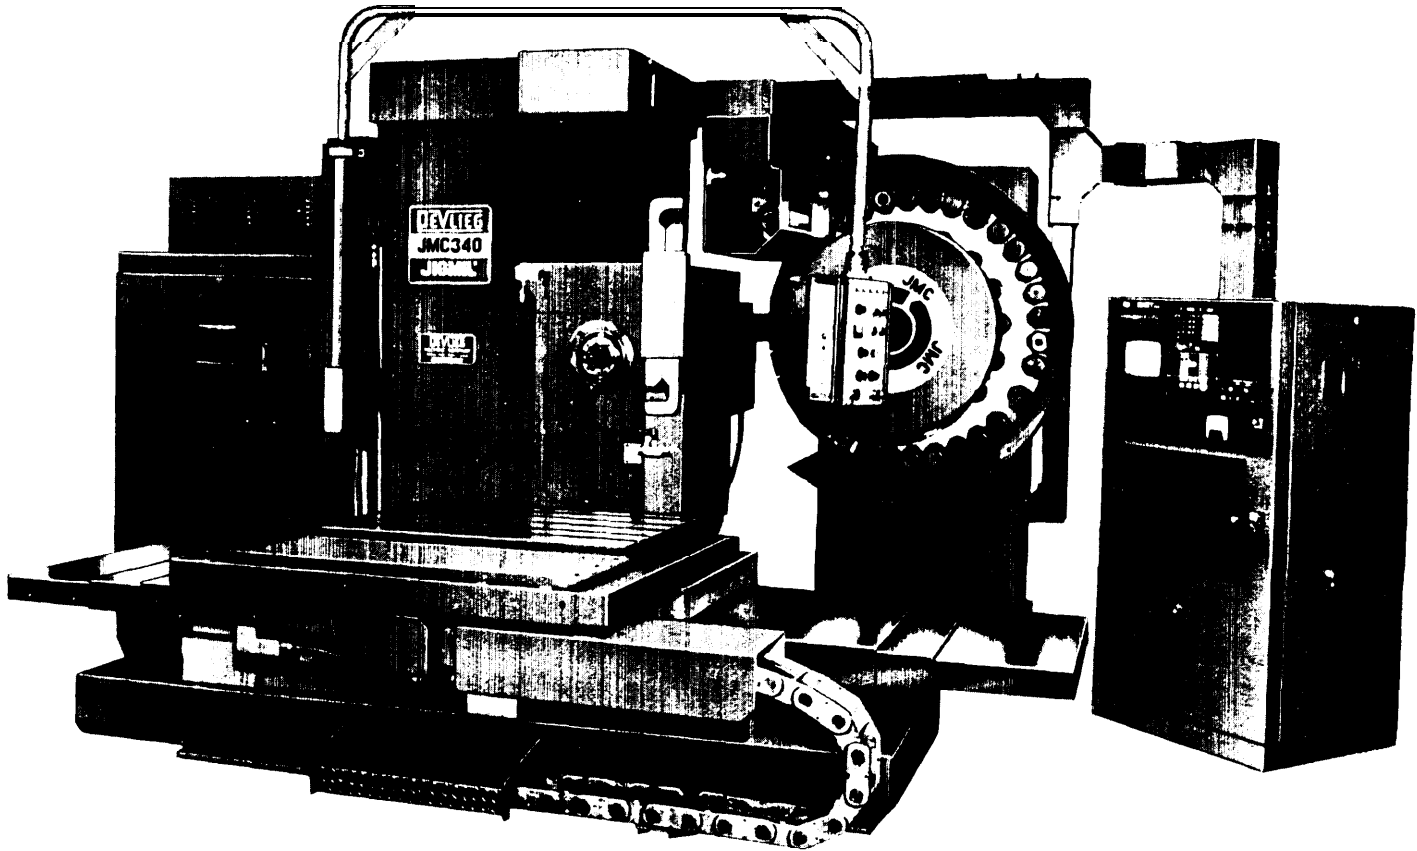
Four-axis, numerically controlled boring and milling machine with automatic tool changer (DeVlieg Machine Company).
